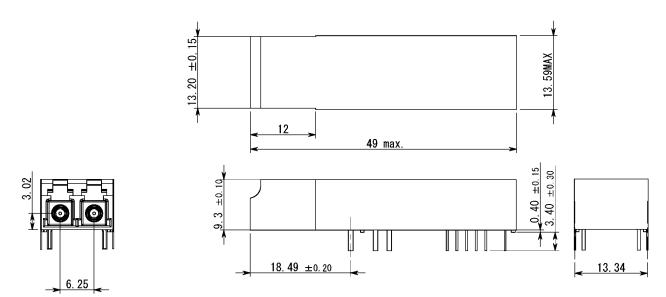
Outline Dimensions (SCM6202-GL-Z#)
